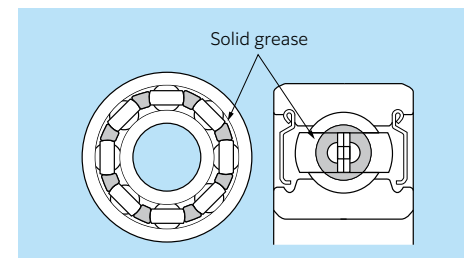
Deep groove ball bearing with spot-pack solid grease (Z shield) (Available for deep groove ball bearings)
